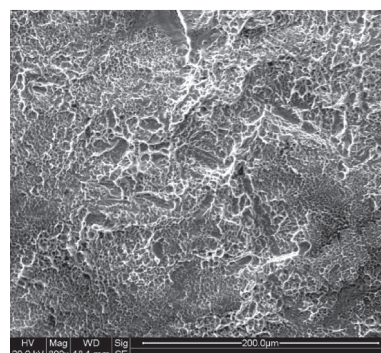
shows the fracture morphology of solder joints under the optimal process parameters: Welding time of 10 ms, electrode pressure of 0.20 MPa and welding current of 46 A. It can be seen from Fig.7(a) that the fracture surface of resistance spot weld presents a typical button fracture, and the crack initiates in the weakest area of the solder joints, that is, HAZ, and it propagates to NZ. By enlarging different typical fracture regions, it can be found that Region 1 (Fig.7(b)) presents typical intergranular fracture mode, forming large tearing holes. Tearing edges are distributed around the holes, and there are typical cleavage surfaces inside the holes, which are mainly caused by the coarse  $\beta$ -columnar crystals in NZ; a large number of small dimples can be clearly seen in Region 2 (Fig.7(c)), and there are ductile faults in this area. Therefore, the fracture mode of spot weld is intergranular brittle-ductile fracture.
